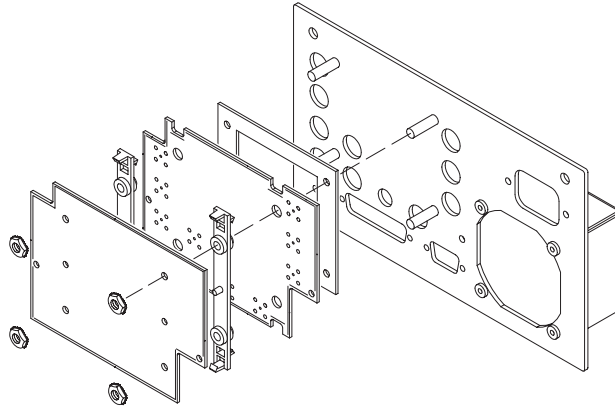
Disassembling Input/BNC Assembly A4/A4–A1
